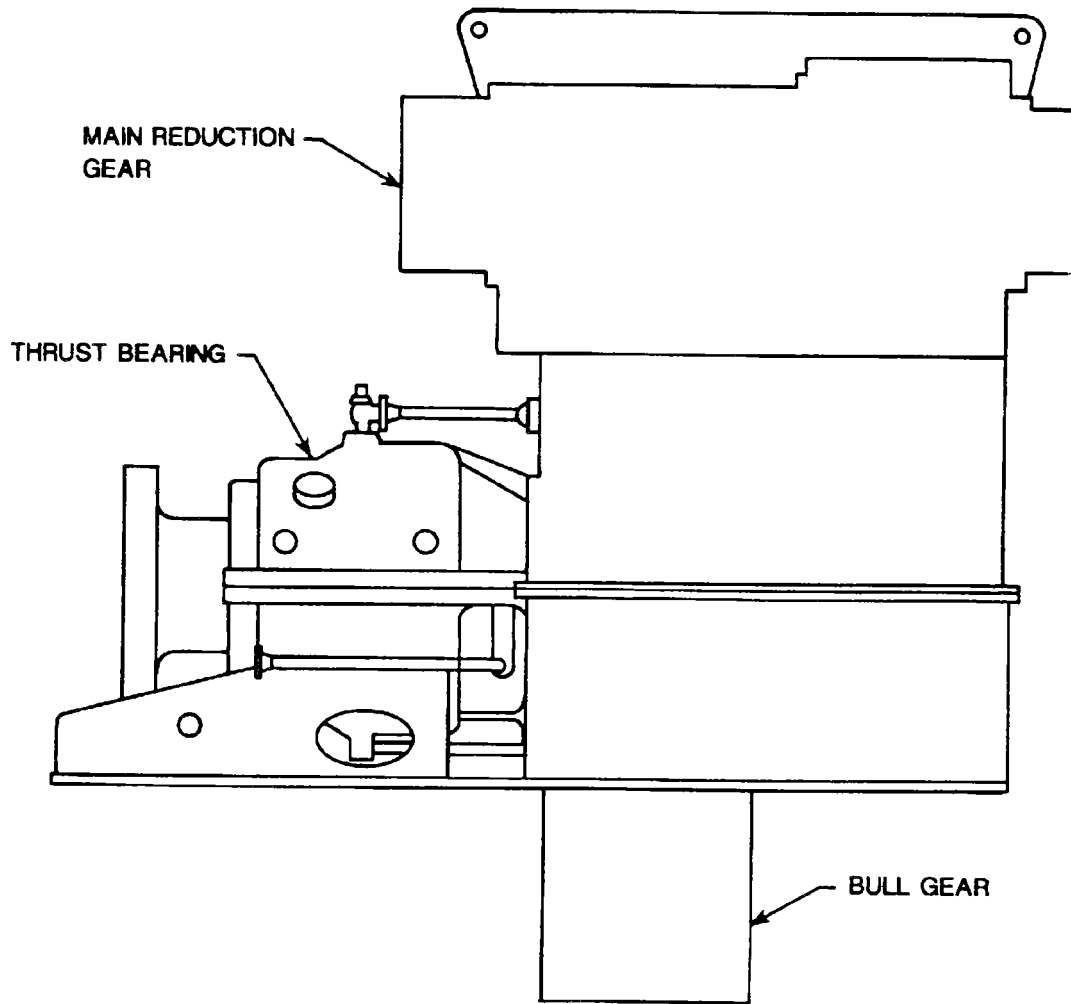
Surface Ship Integral Mount Thrust Bearing Arrangement
